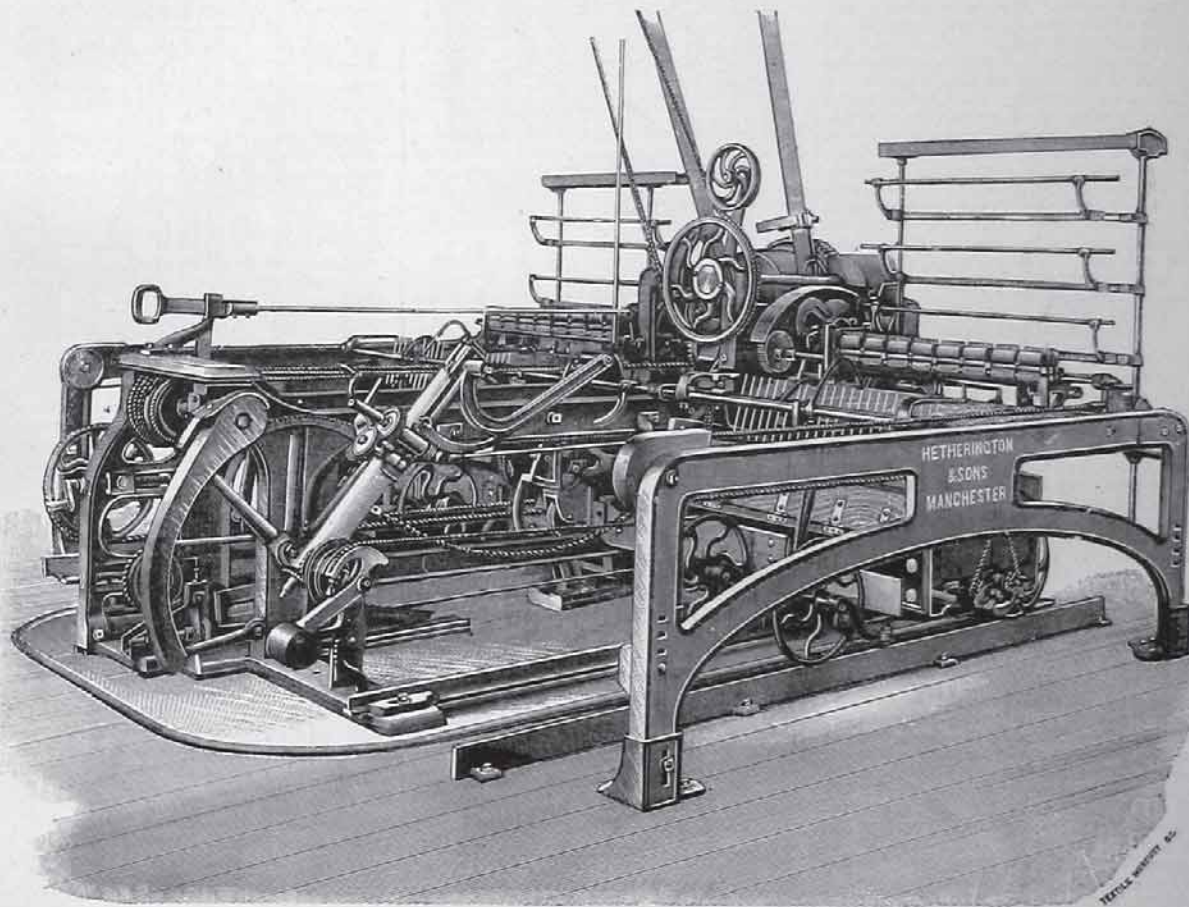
IMPROVED MULE HEADSTOCK, FRONT VIEW.—MESSRS. JOHN HETHERINGTON AND SONS, LIMITED, MANCHESTER.
